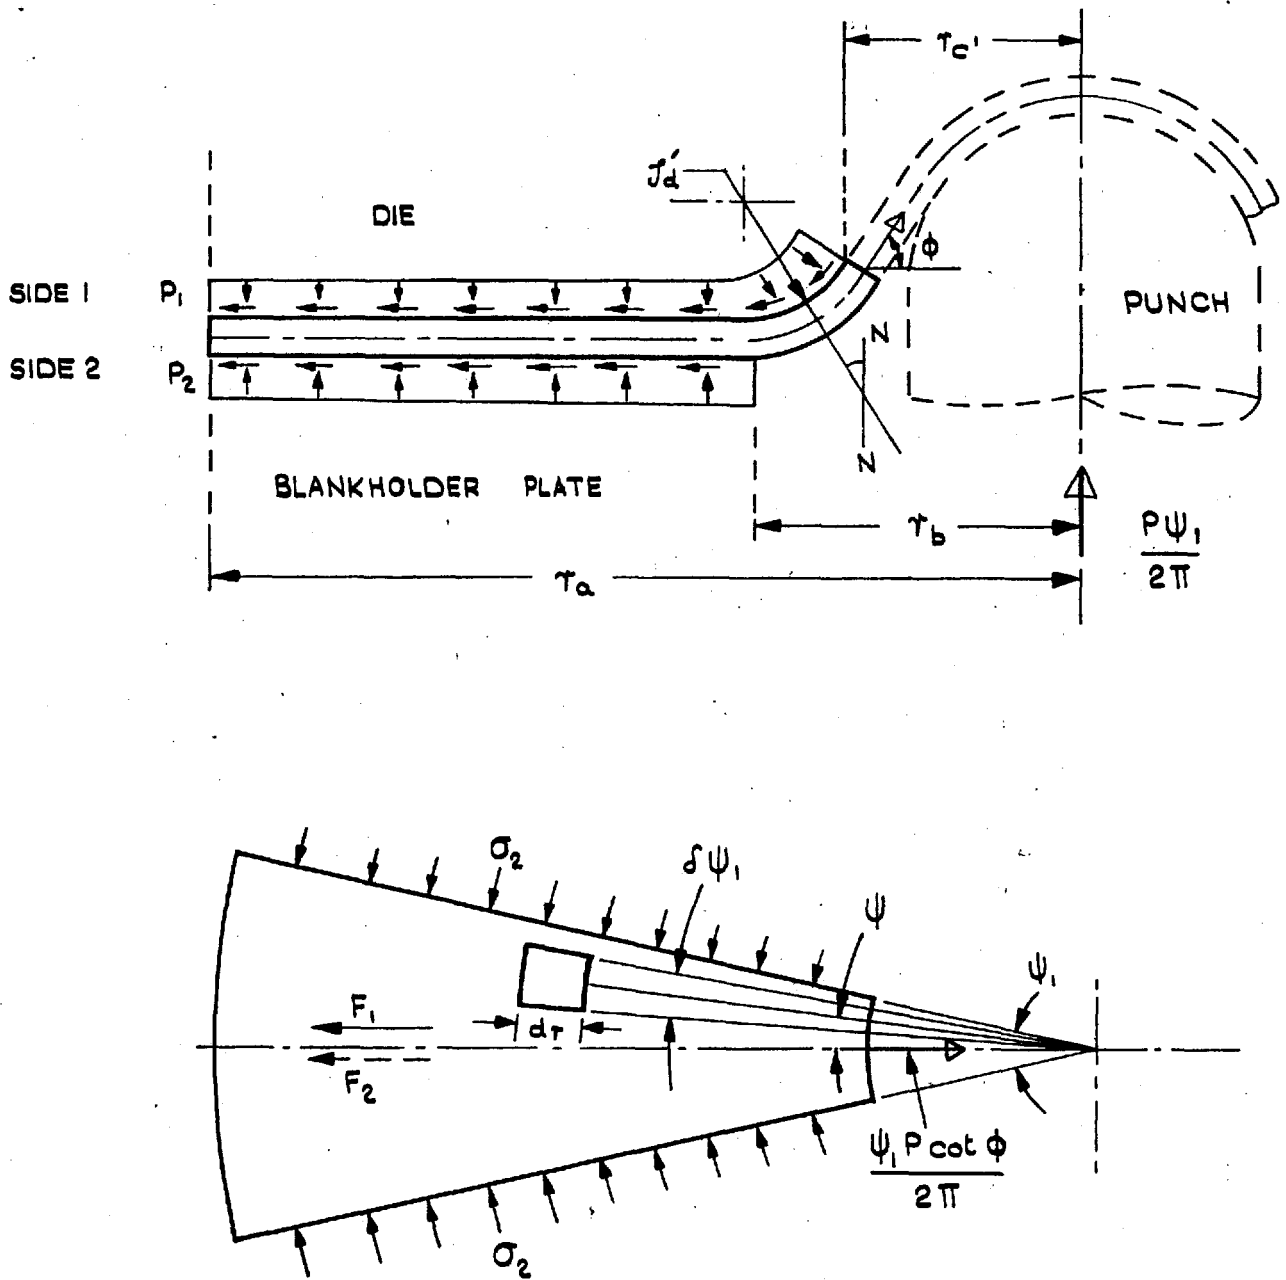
A LARGE SEGMENT OF SHEET METAL IN CONTACT WITH THE DIE AND BLANK-HOLDER PLATE.
